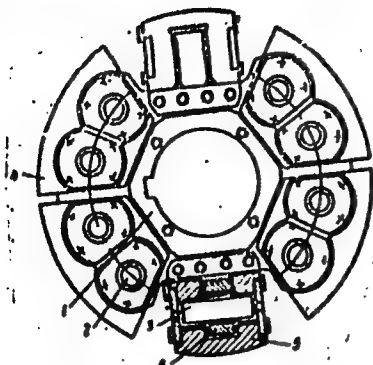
1 - hub; 2 and 3 - fingers; 4 and 5 - pendula; 6 - bearings
